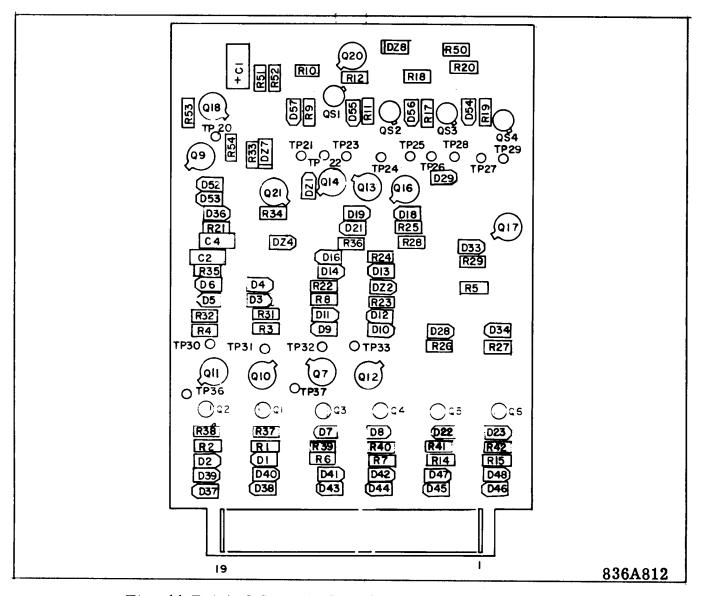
Printed Circuit Board Assembly for the SDB Relay
